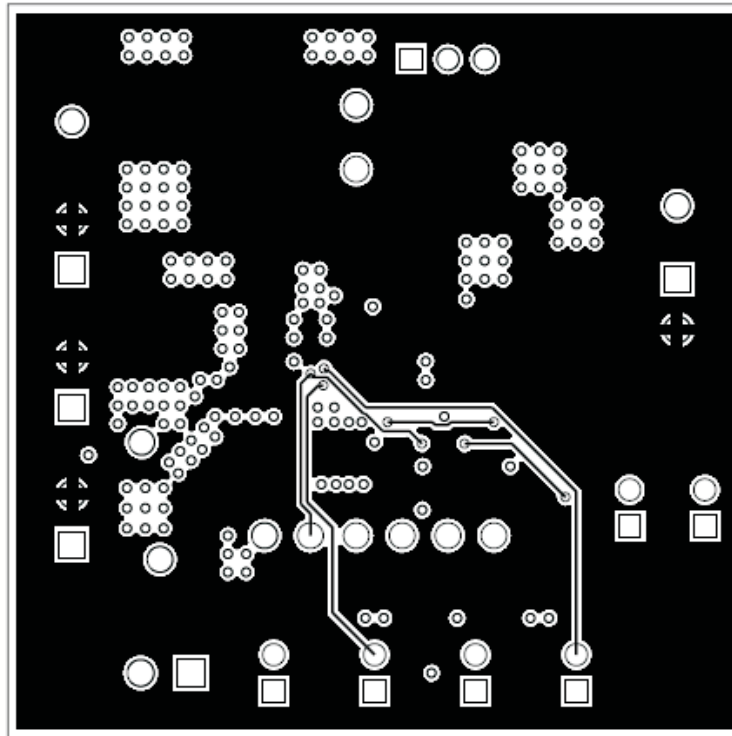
TPS2505 EVM PCB Bottom Layer Layout
